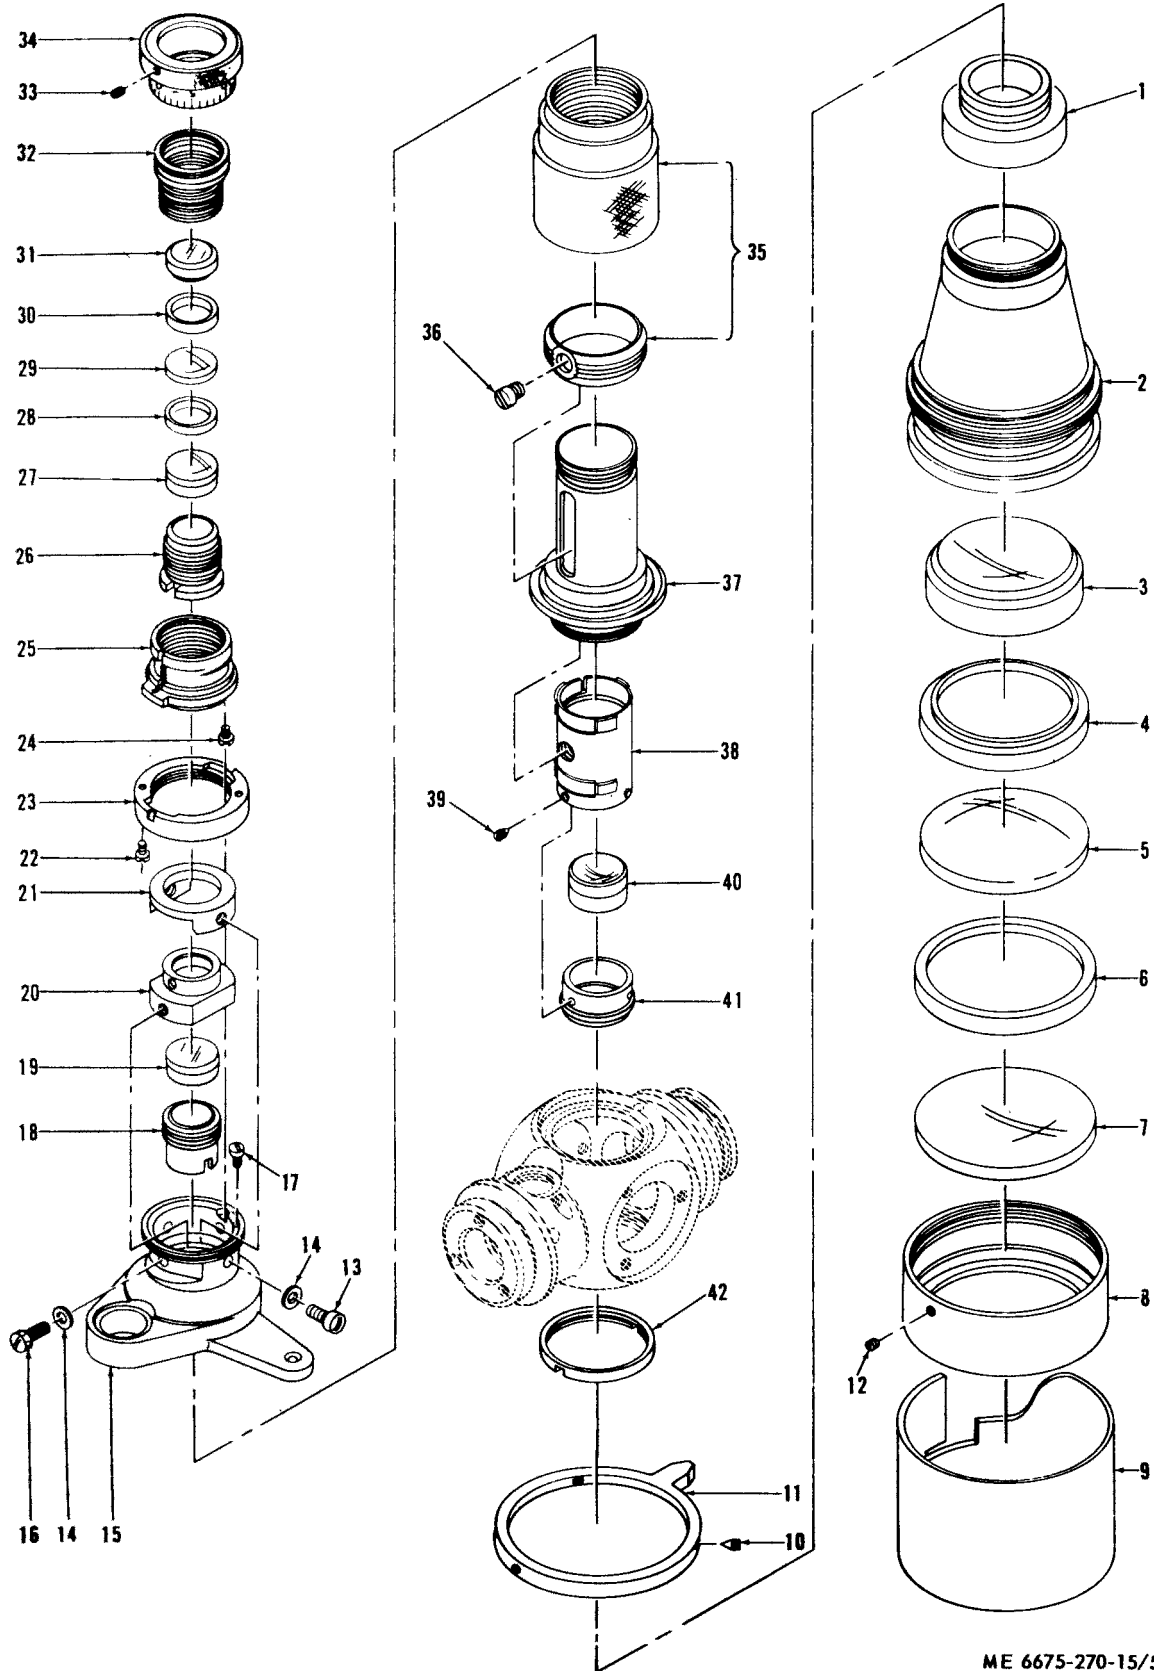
Telescope eyepiece and reticle assemblies, removal and installation.
